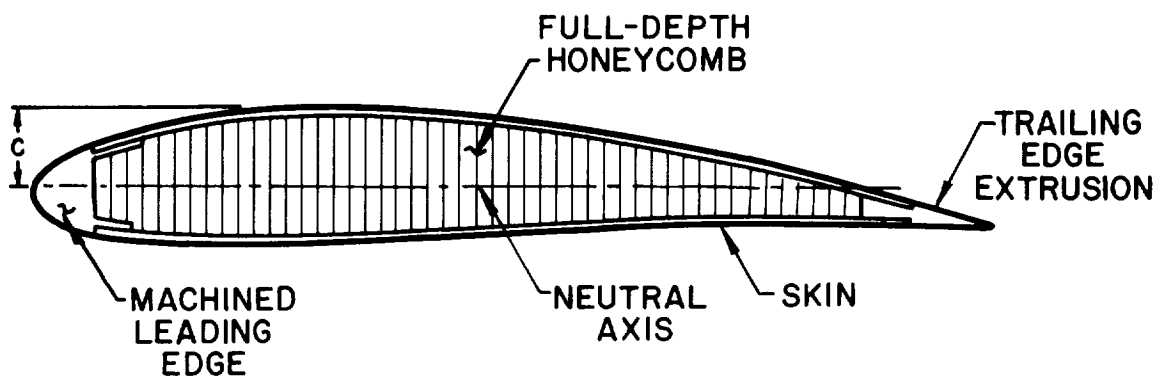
TYPICAL HONEYCOMB-CORE SANDWICH FLAP ELEMENT.
